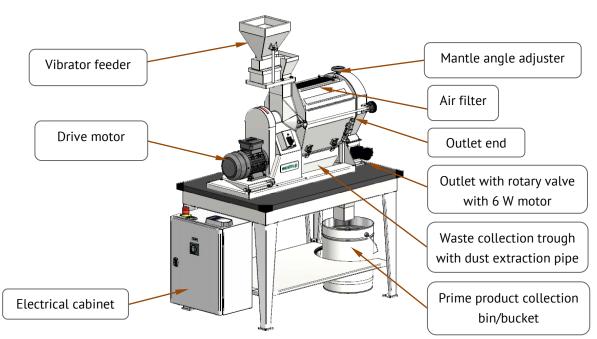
LA-HO Standard machine configuration with Optional bucket.
